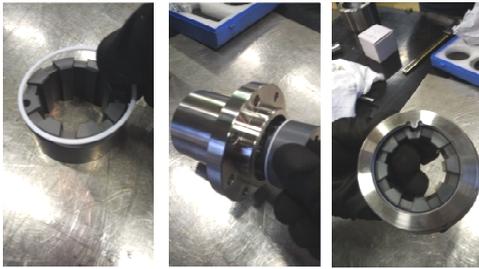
Insert the gasket (411.x) on the bearing bushing (545); insert all in the support "housing" (352). Warning! The shapes must coincide.
